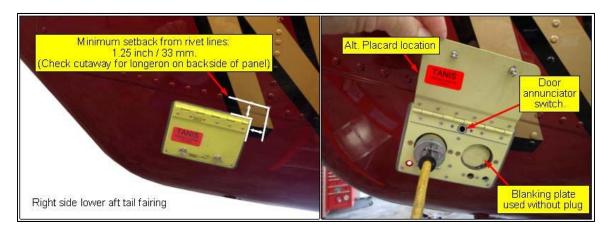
Align door on aft right side of lower tail fairing as shown. Measurements from rivet line for clearance of inner core edge set back. Door kit may be located level with ground, before cutting verify inner core edge clearance and ability to conform to panel contour.
